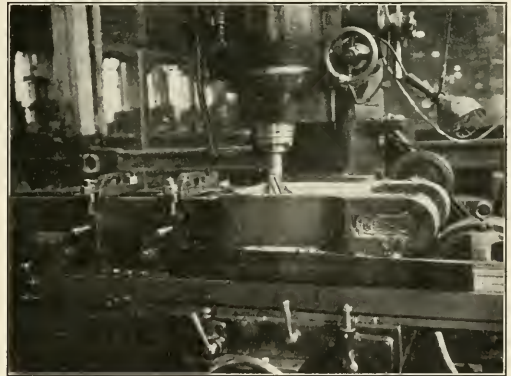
The Vertical Knee Type Machine with Cutter Supported at Lower End Takes Heavy Cuts
